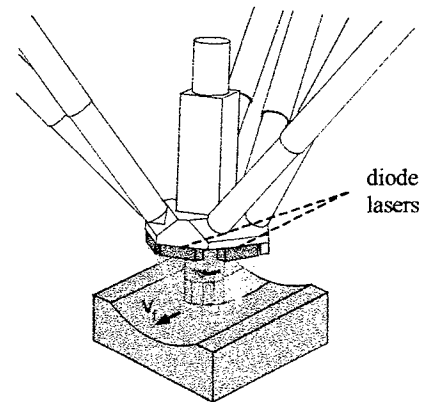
sketch of diode laser integration into a hexapod milling machine [29]
